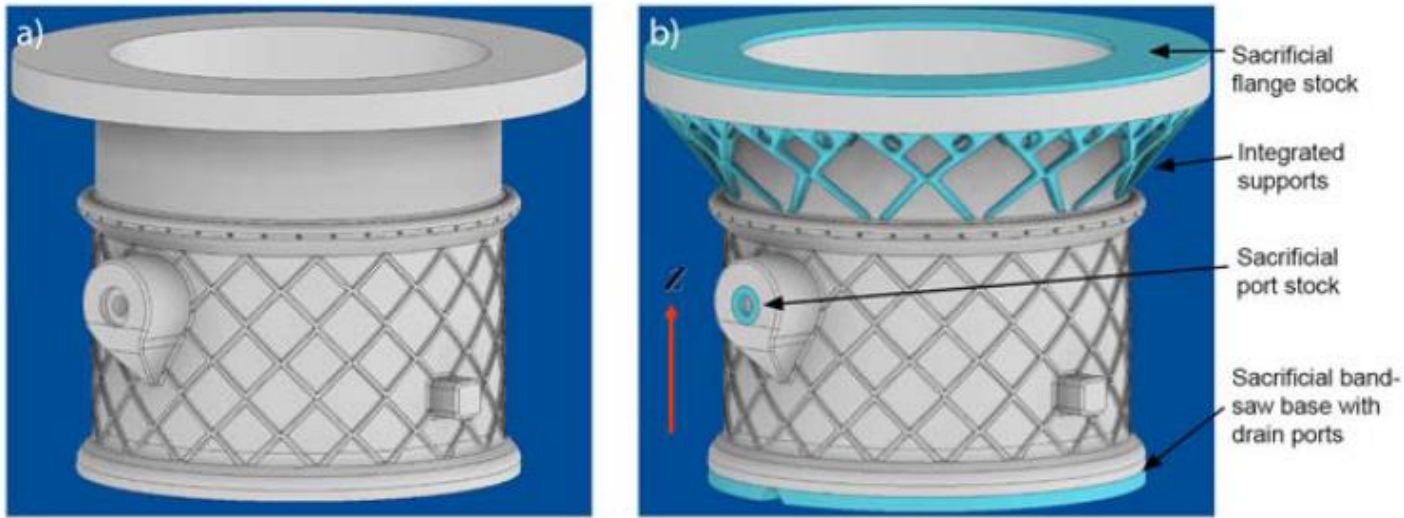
Part a) in final machined condition and b) integrated supports, stock added to interfaces, and drain ports.
